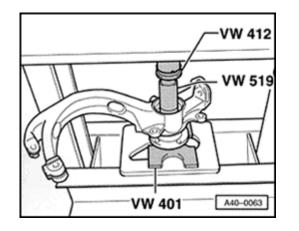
Pressing wheel bearing into 85 mm diameter wheel bearing housing
